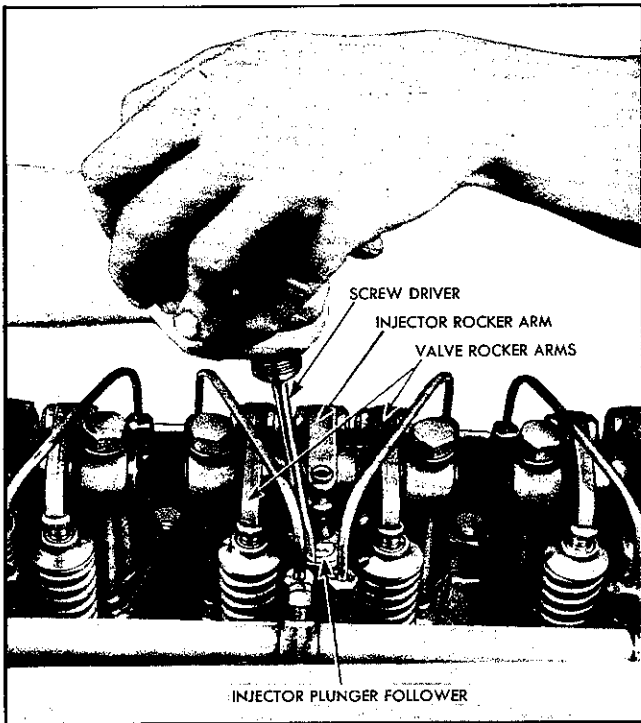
Cutting Out an Injector by Depressing Injector Follower.
